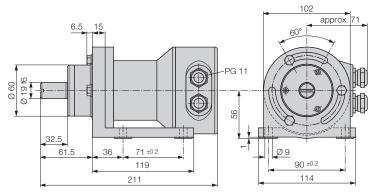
KINAX WT 707 with additional gear, screw terminals, cable glands and foot.
